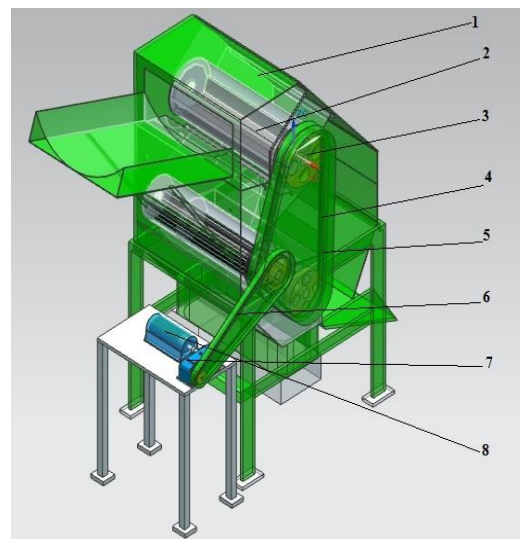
Magnetic separator 1 - Framework, 2 - magnetic drum, 3 - belt wheel, 4 - belt guard, 5 - drum drive belt, 6 - reducer drive belt-magnetic separator, 7 - reducer, 8 - magnetic separator drive motor
